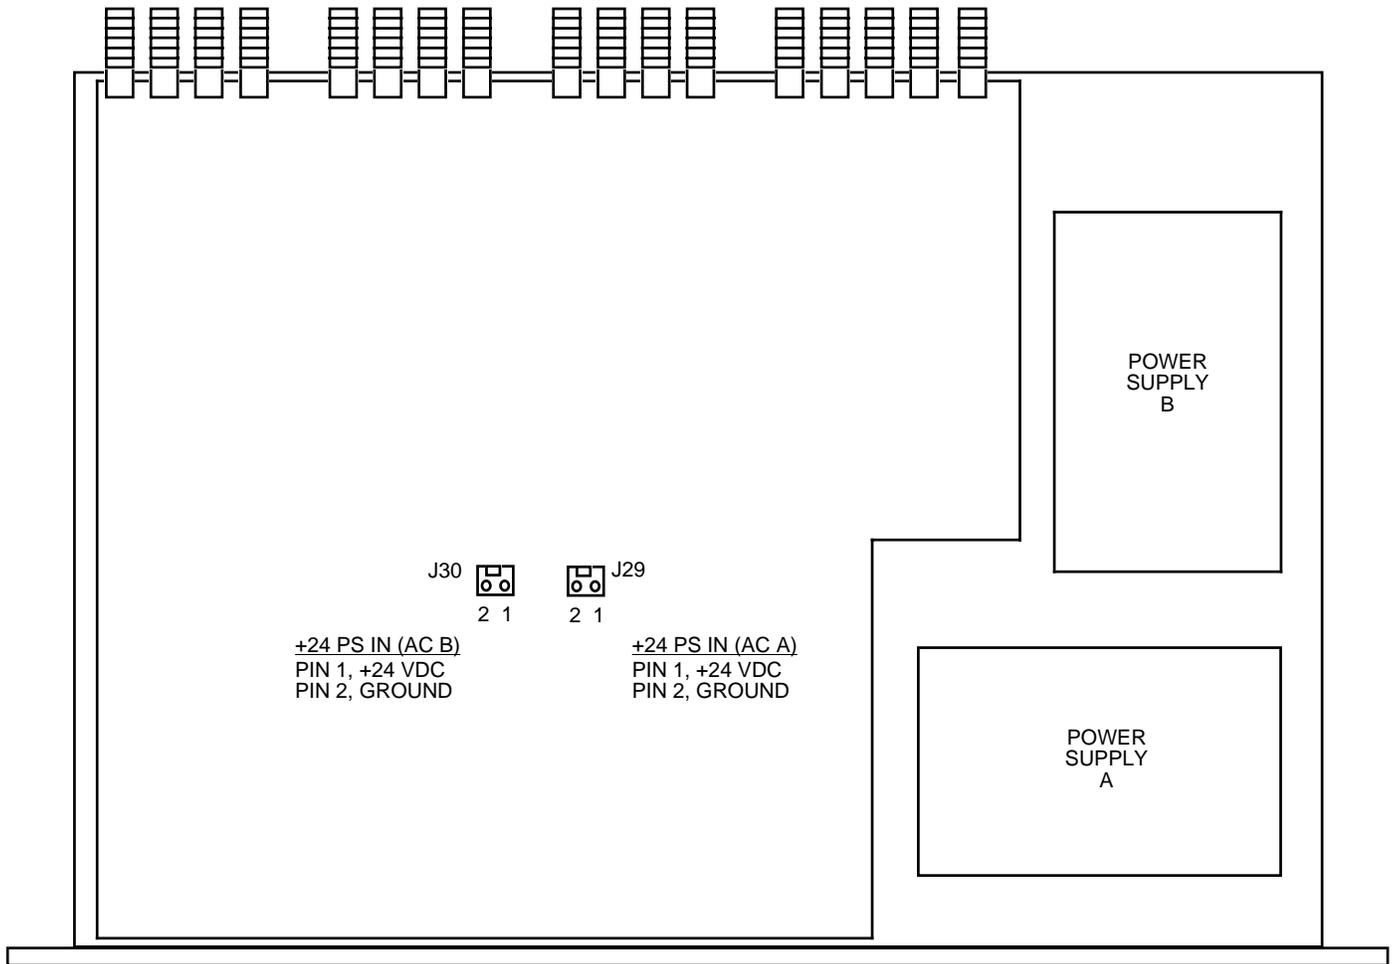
1584-161 MECHANICAL ASSEMBLY
